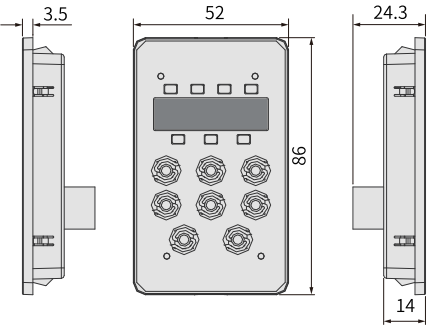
Overall dimensions of the MD310-KEY operating panel (unit: mm)
